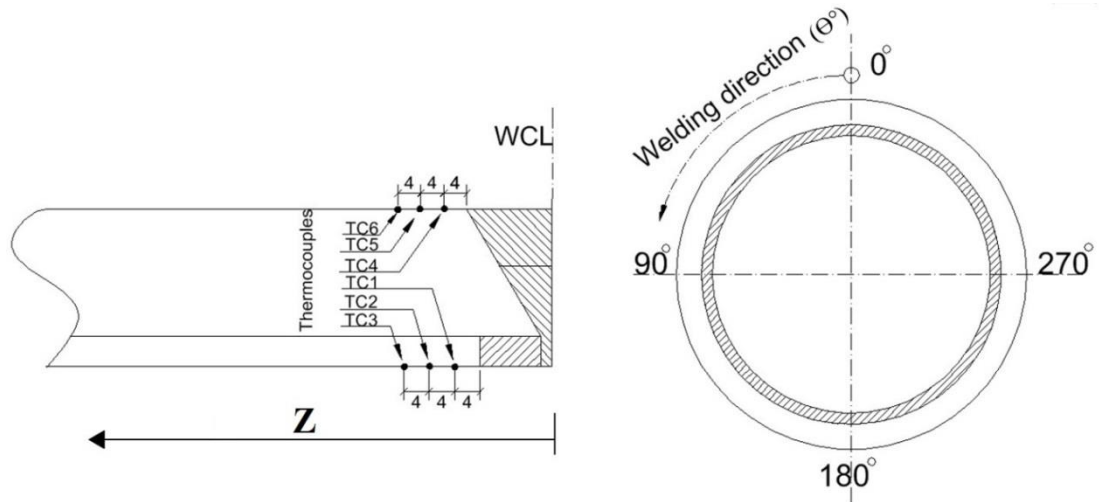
Locations of thermocouples and the welding direction for three passes, dimensions in mm
